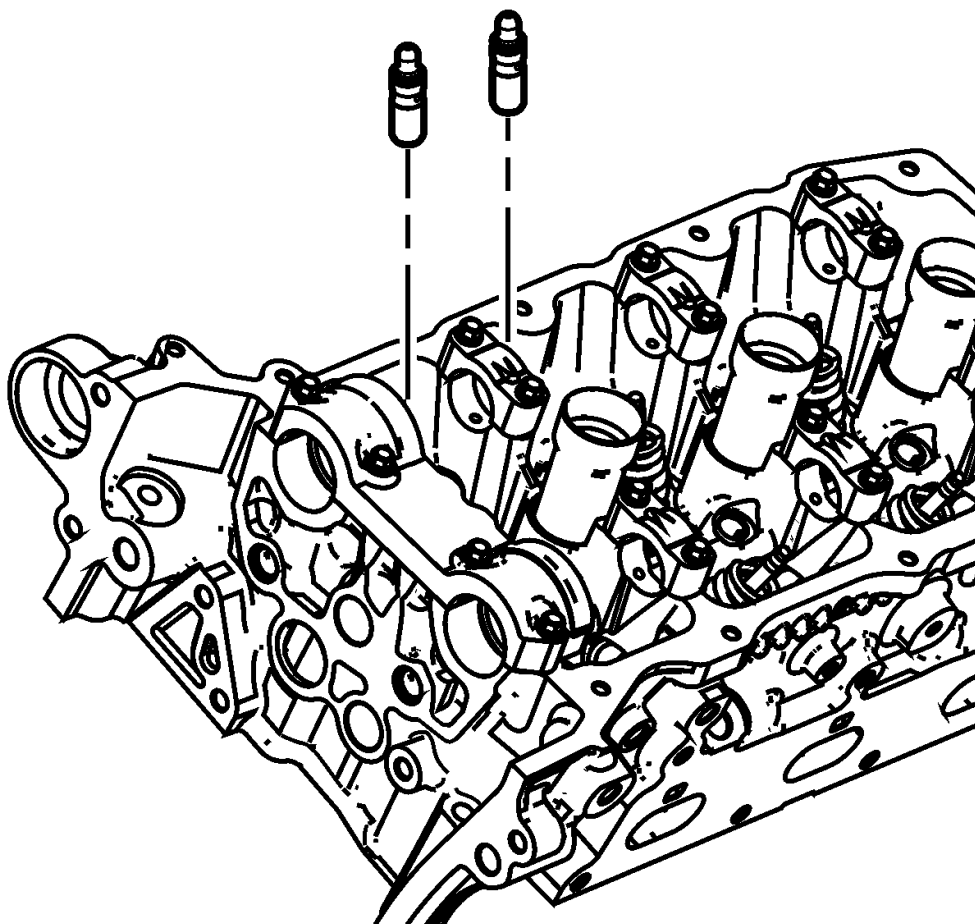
View Of Stationary Hydraulic Lash Adjuster (SHLAs)
